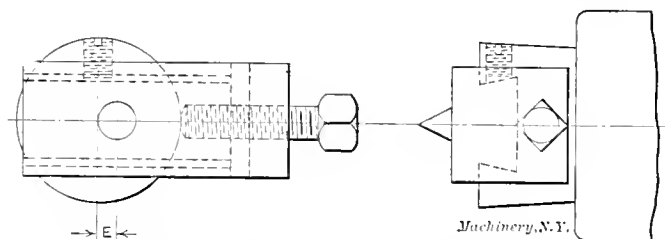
Tail-center for Threading Lathes, permitting Slight Tapers to be obtained without Setting over Tail-stock proper.
